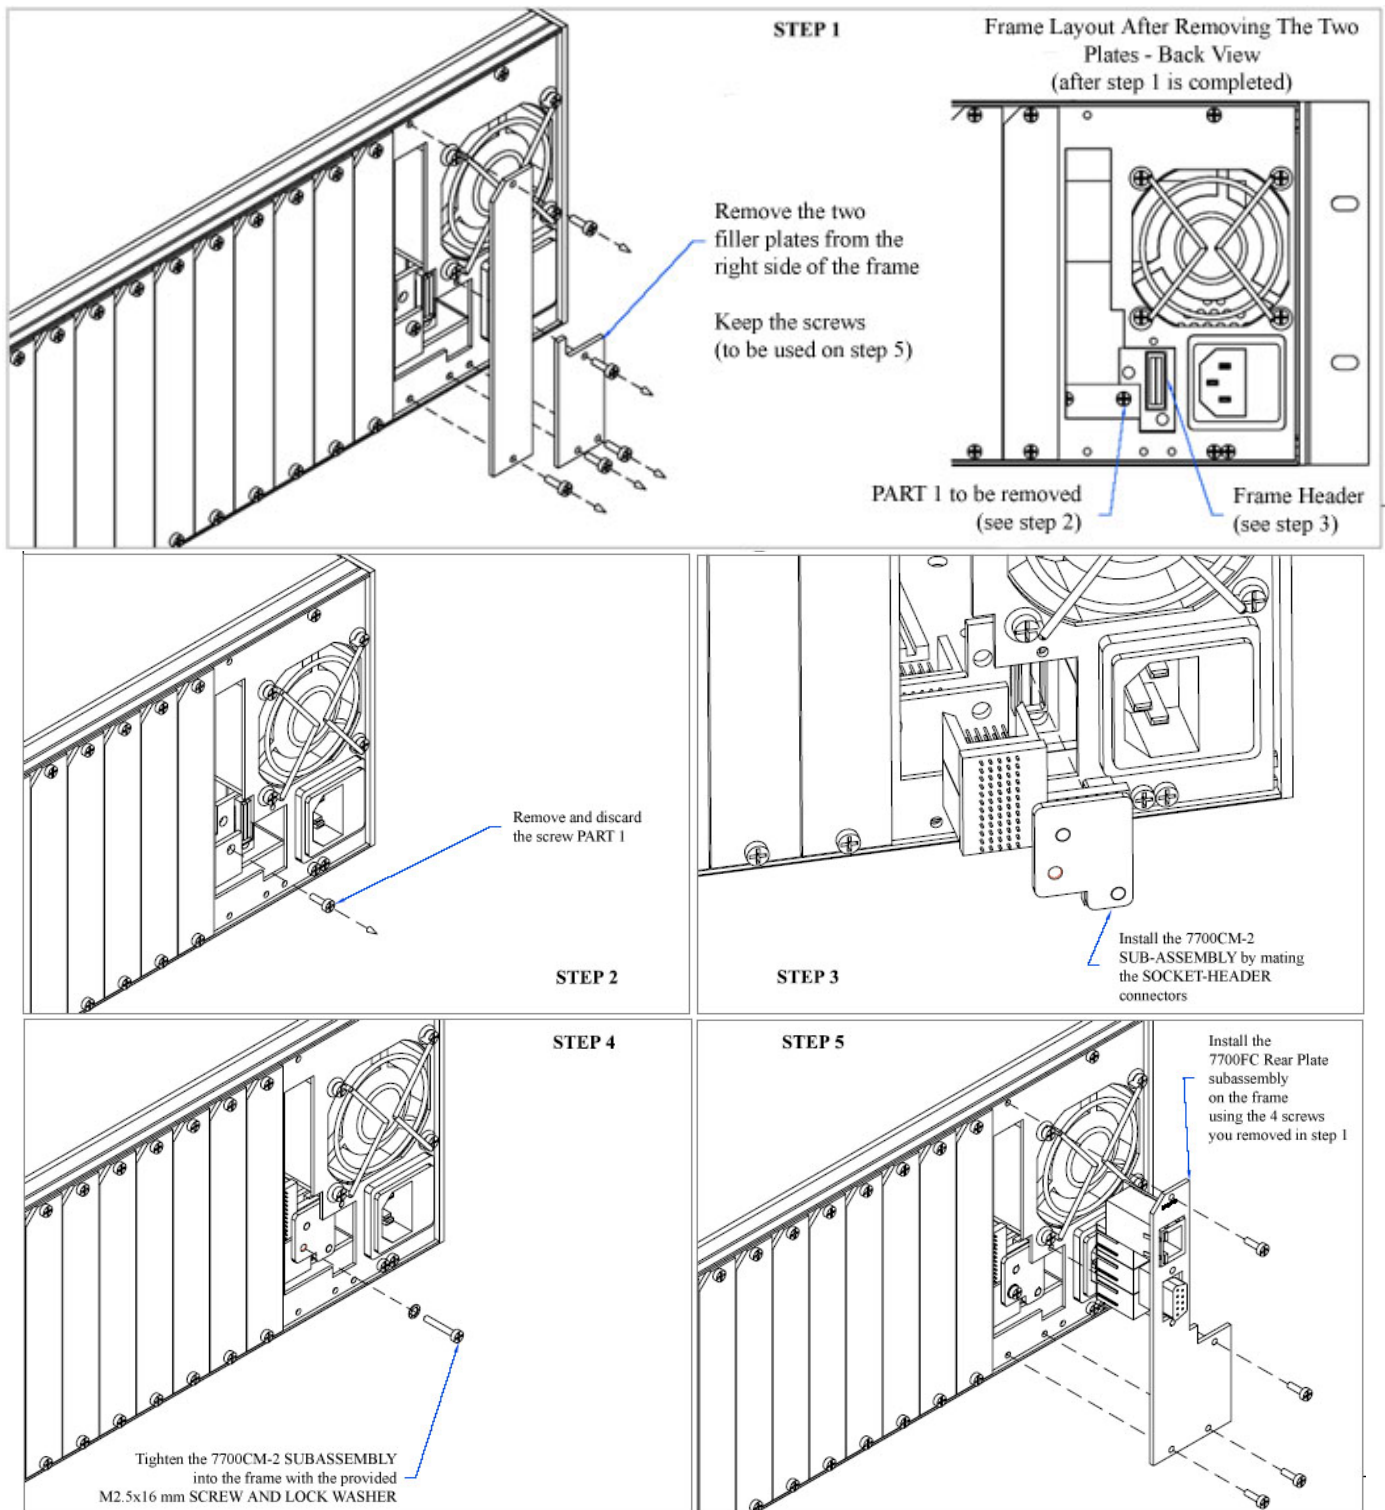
7700FR-C Rear Panel Kit Installation
